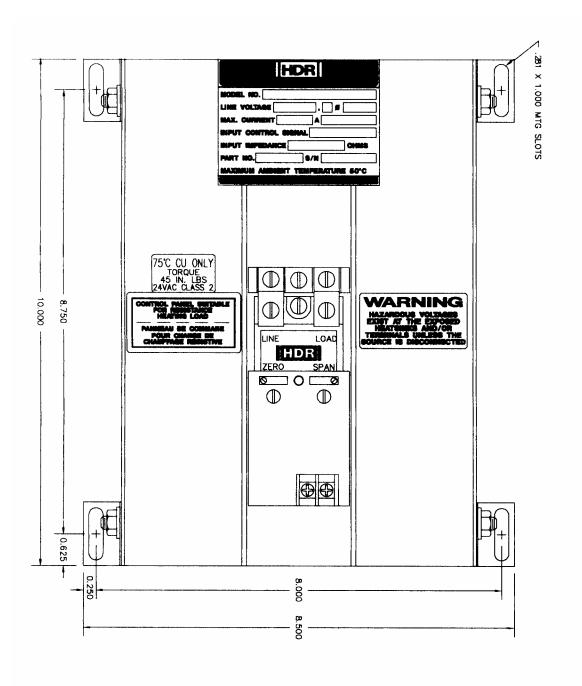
OUTLINE and MOUNTING DIMENSIONS ZF2 – 15, 25 & 40A
